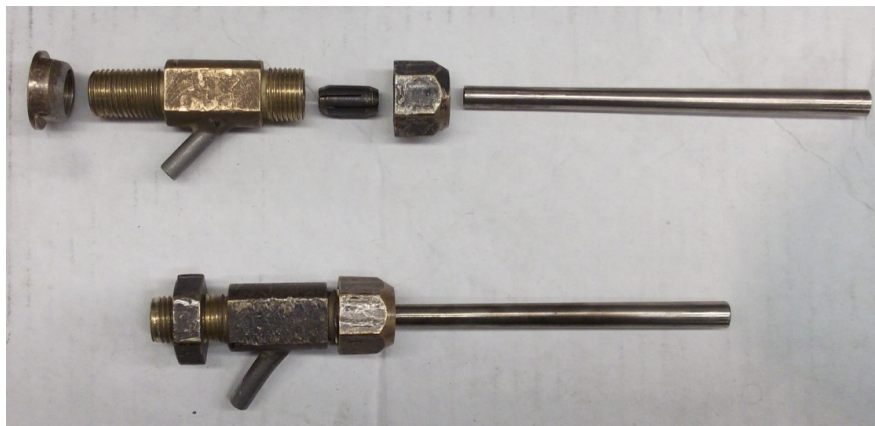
Disassembled and Assembled De Laval nozzle showing (from left to right): heater nut, brass orifice, collet, tightening nut, and stainless steel nozzle.
